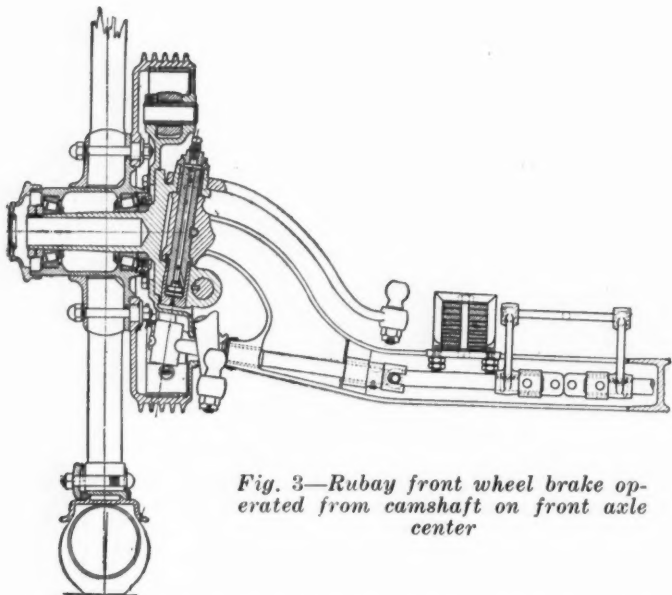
Rubay front wheel brake operated from camshaft on front axle center
